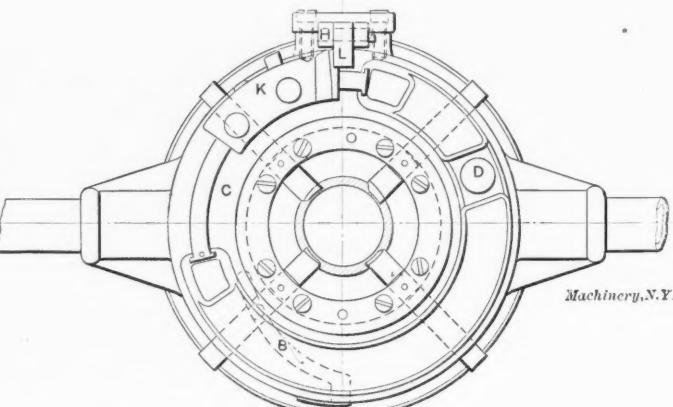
Front View of the Buckeye Die-stock, showing Cam Plate, Adjusting Dog and Stop, and Cut-off Attachment.
